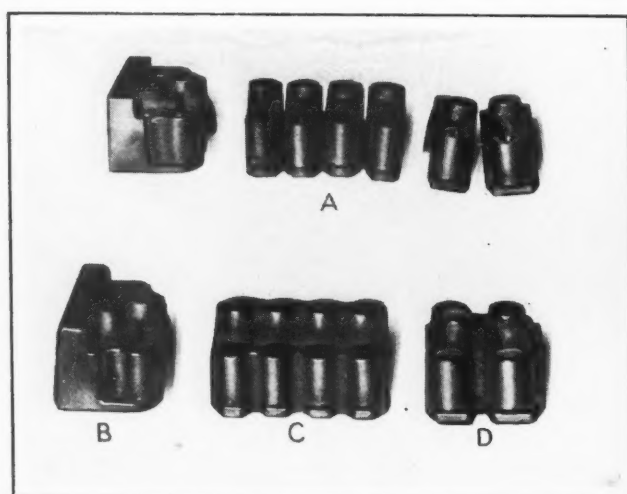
Seven Crankshaft Bearing Caps and the Three Castings from which They are Produced
